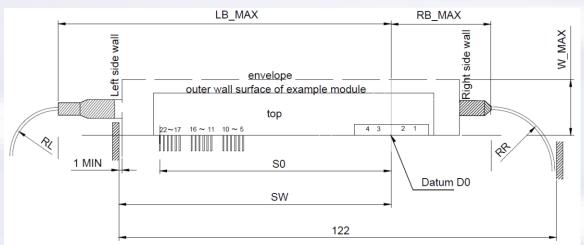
Location of Datum and dimensions related to Envelope Type 4 (top view).
